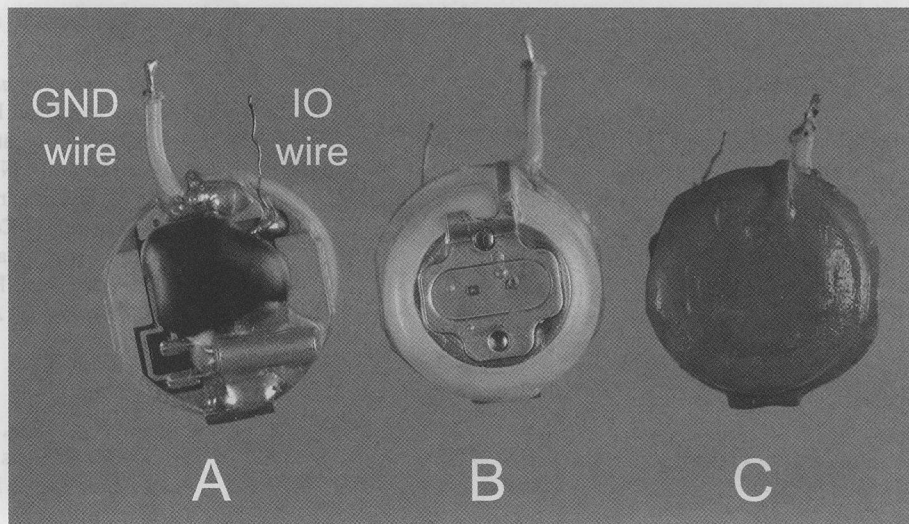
Reconstructing the DS1921 Thermochron iButton without housing (A) Circuit board soldered to battery with rigid exposed wires attached (B) Insulated battery soldered to circuit board viewed from above (C) Modified unit complete and coated in red Plastidip®.
